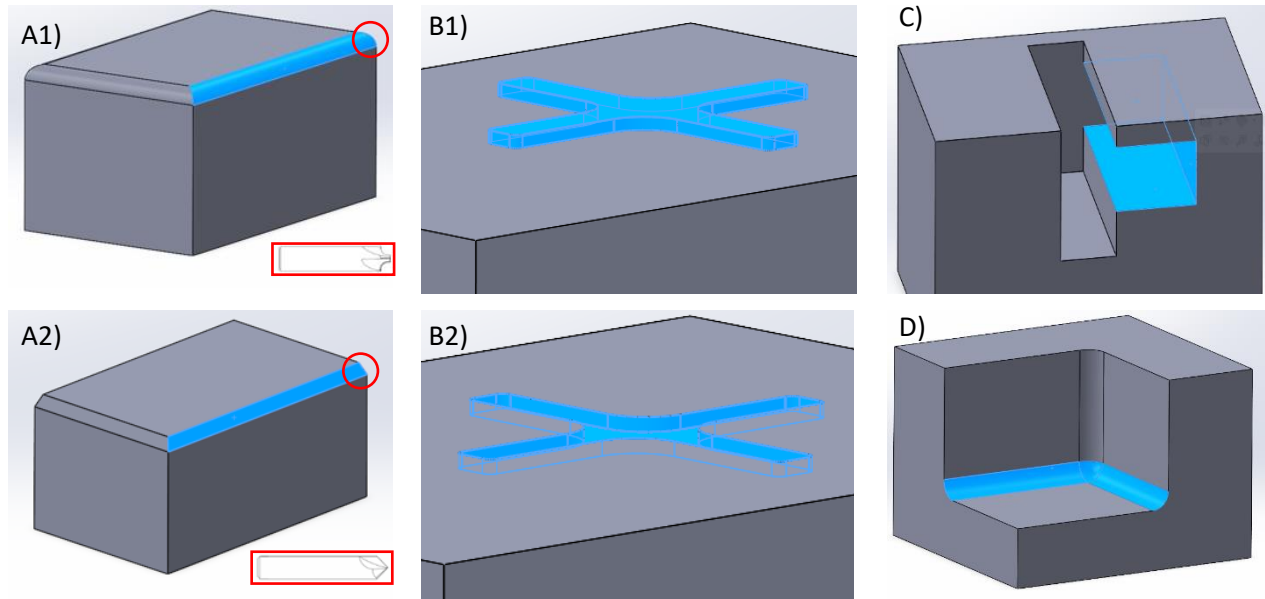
Example models demonstrating features relevant to DFM for CNC milling. In Figure A1, the fillet on the model would require a custom tool to machine whereas a chamfer of the same size like in Figure A2 would only require a fairly standard, straight-sided chamfer tool. A machining strategy for the part in Figure B1 would require all of the surround material to be removed from the stock to leave behind the raised boss whereas depressing the boss in the model like in Figure B2 would mean a much smaller amount of material would need to be removed. Figure C illustrates a part that would not be possible to be machined due to a feature that can't be reached and sharp interior corners. Figure D meanwhile would require a very specific radiused end mill in order to machine the bottom fillet, and, if the fillet is not of a standard size, a custom end mill would be needed to be used.
